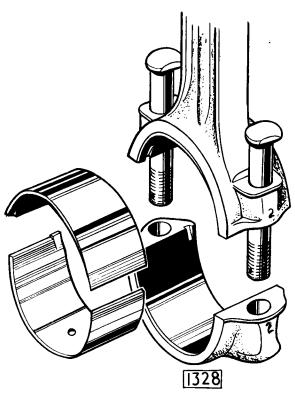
The connecting rod and cap are stamped with the cylinder number.
